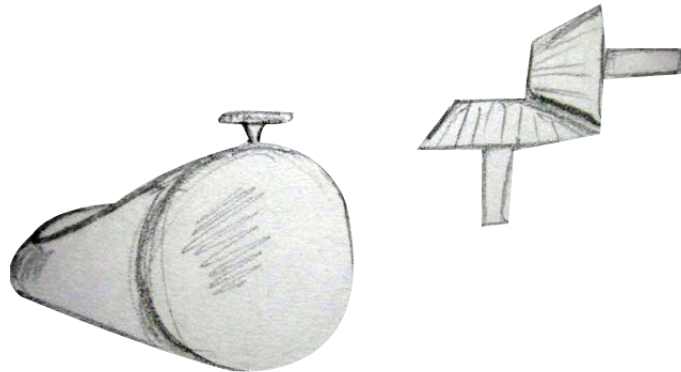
Mechanism to adjust the diameter of the ring using bevel gears
